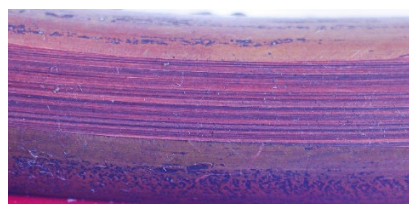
The photo of the surface of the MF-100 contact wire before the start of the bench tests
